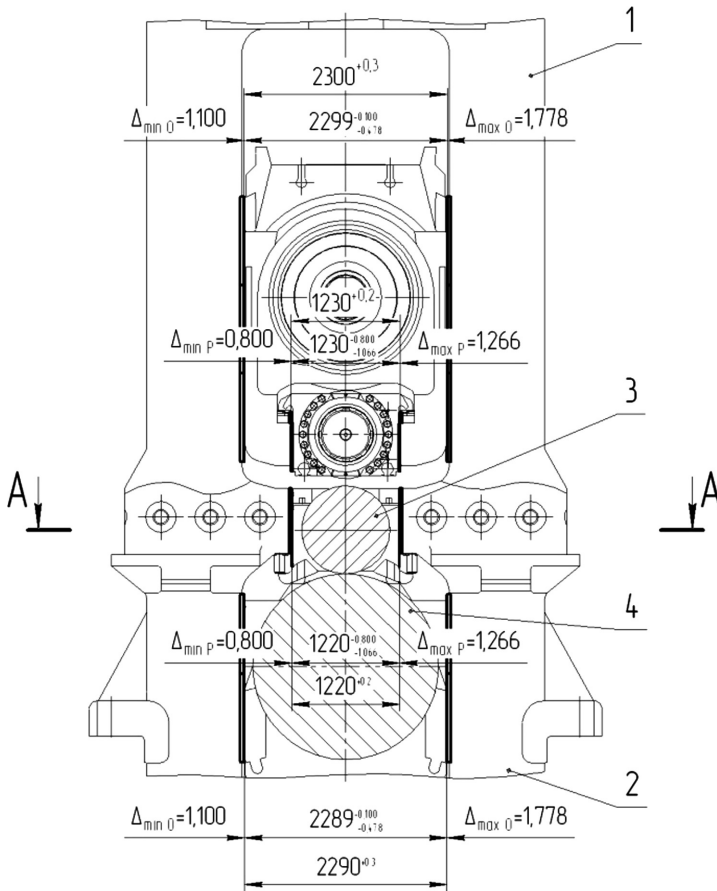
General view of reversing roughing rolling stand from operator side: 1 is housing from operator side; 2 is housing from drive side; 3 is BWR; 4 is bottom backup roll.
